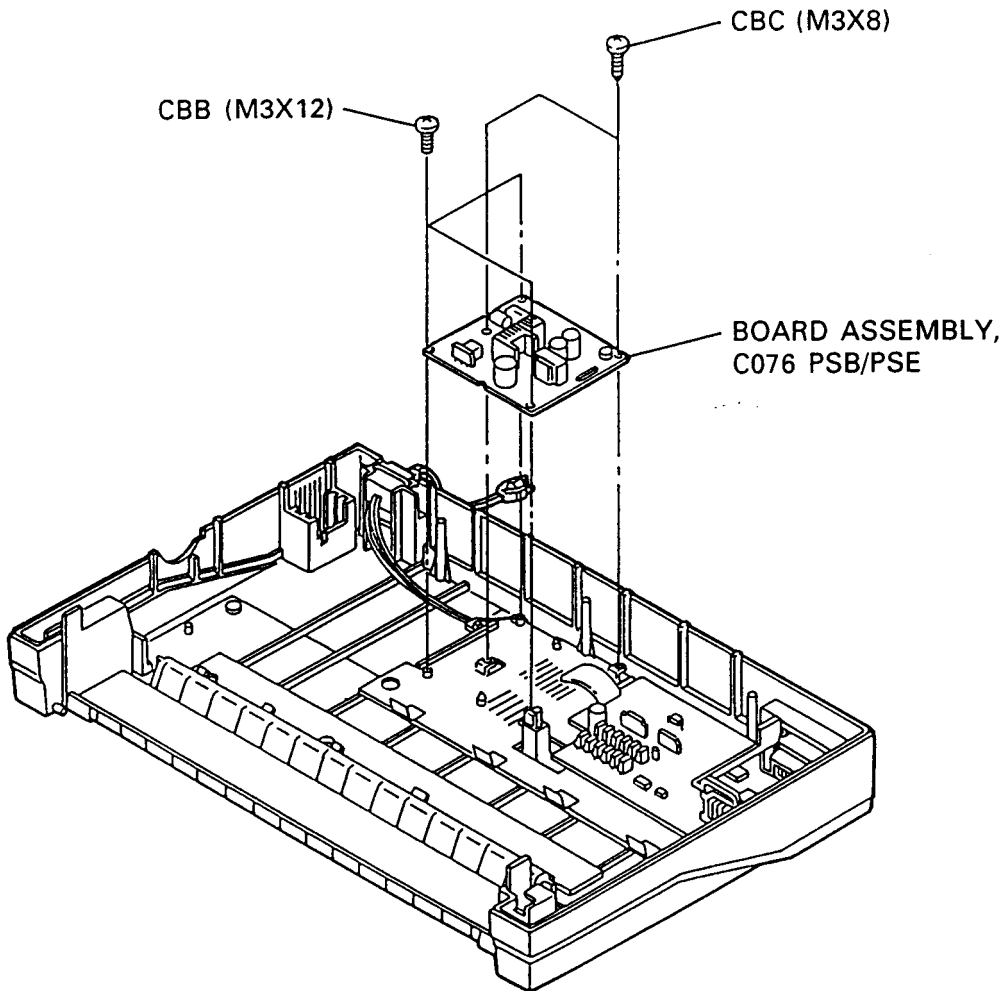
Removing the BOARD ASSEMBLY, C076 PSB/PSE
